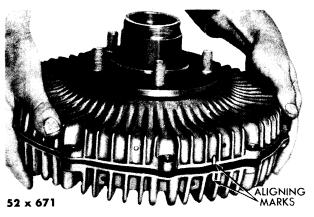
Brake Housing Aligning Marks (Front Disc Brake)
